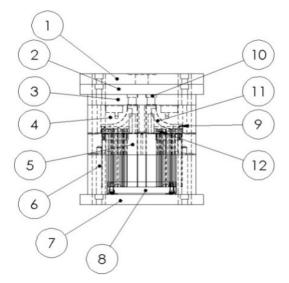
Components of molding mechanism 1 –2) Upper stationary plate; 3) Upper supporting plate;
